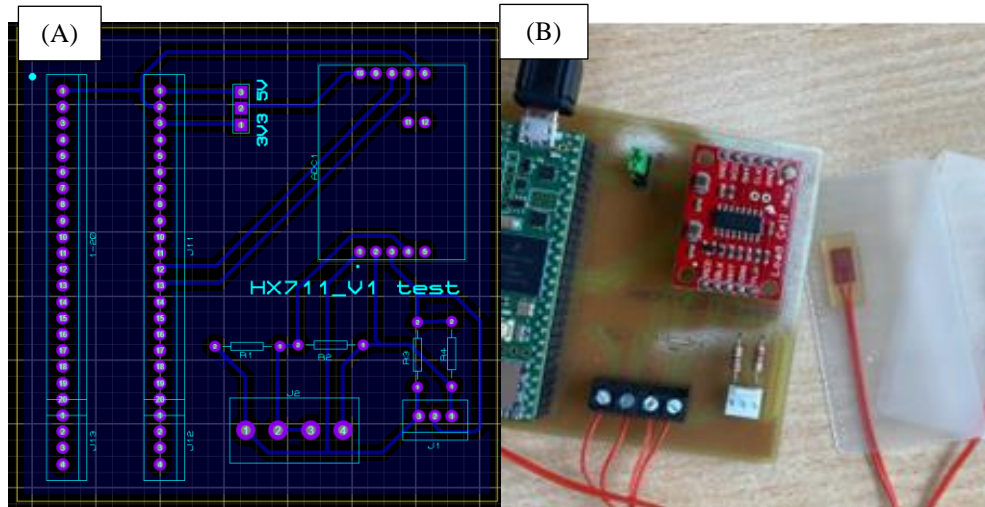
PCB 1 a) Simulation b) Assembled PCB
